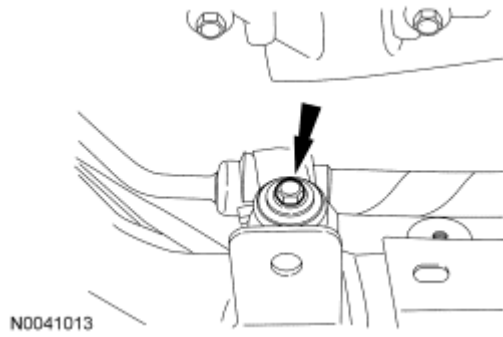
Locating RH Power Steering Tube Bracket Bolt
